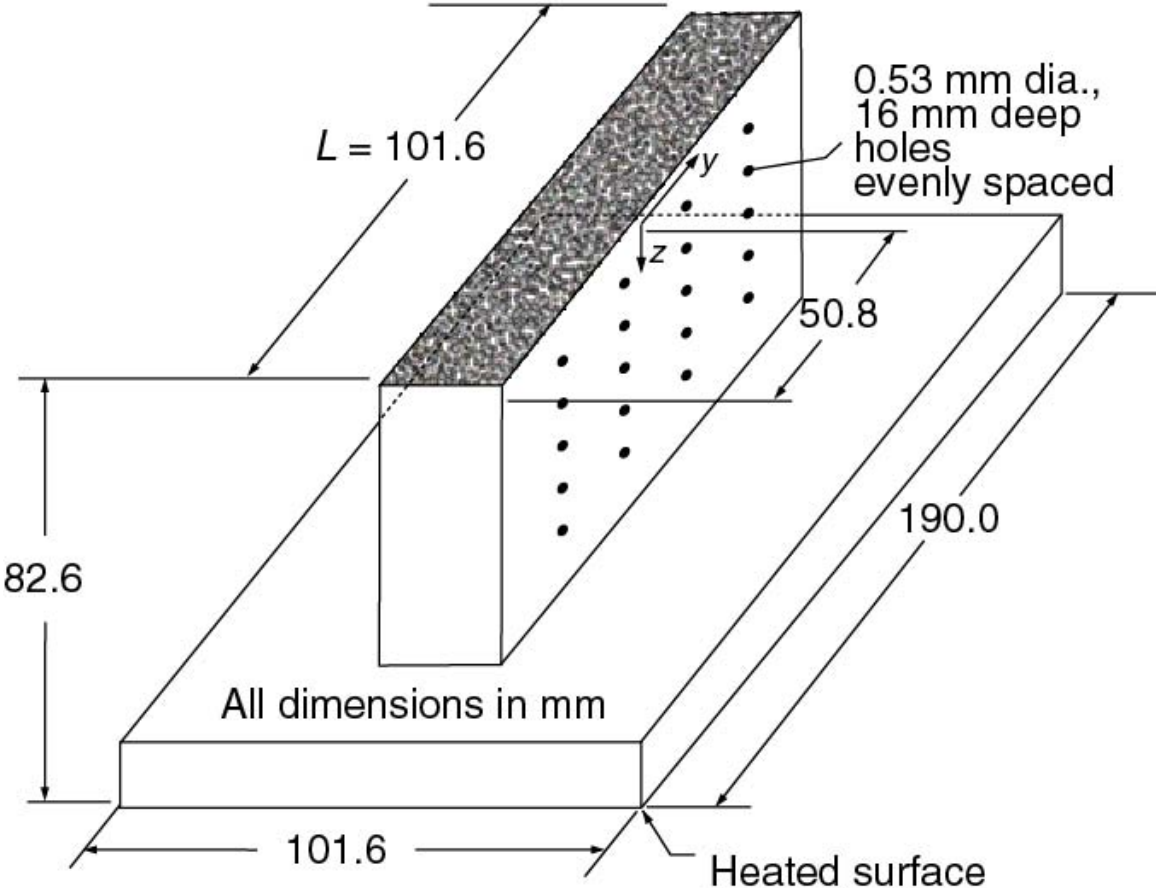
OFHC copper flat test plate with Turbo-BII-HP surface and thermocouple coordinate system
